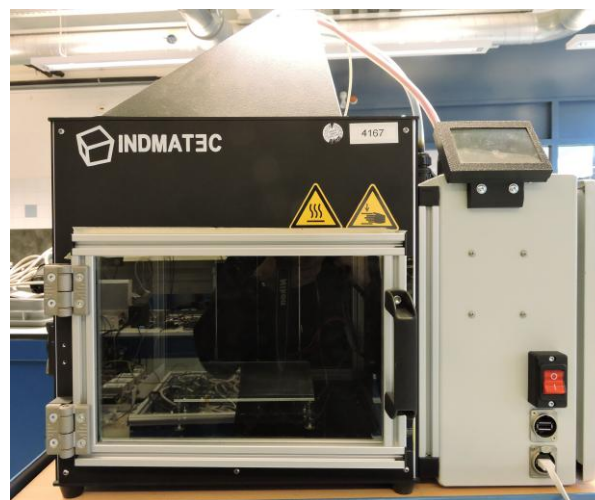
The PEEK 3-D printer used for the extrusion process
